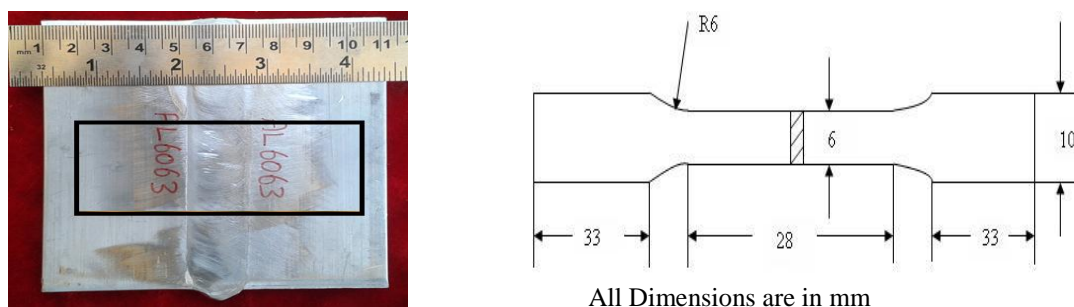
Location of Weld Direction in Tensile Test Specimen
